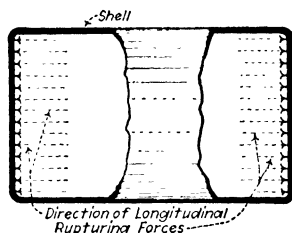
Illustrating direction of pressure acting to separate wall of cylindrical shell roundabout.
